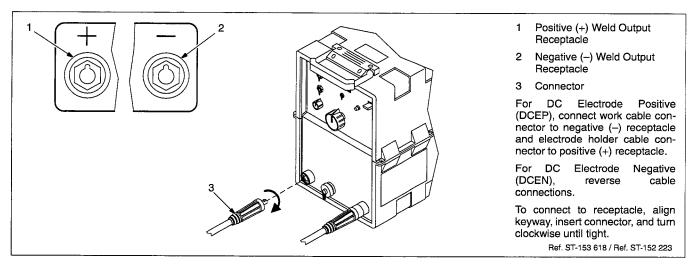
Connecting To Weld Output Receptacles
